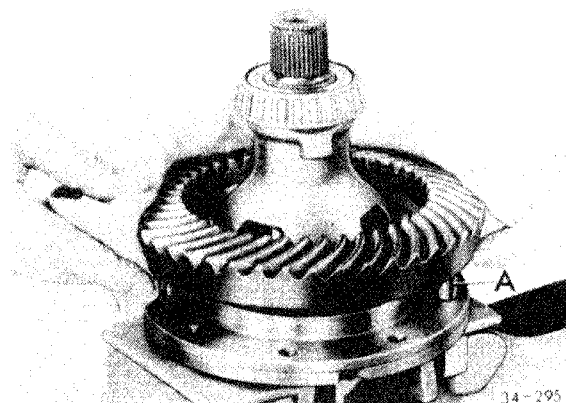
Differential bearing/inner race (ring gear side), installing
